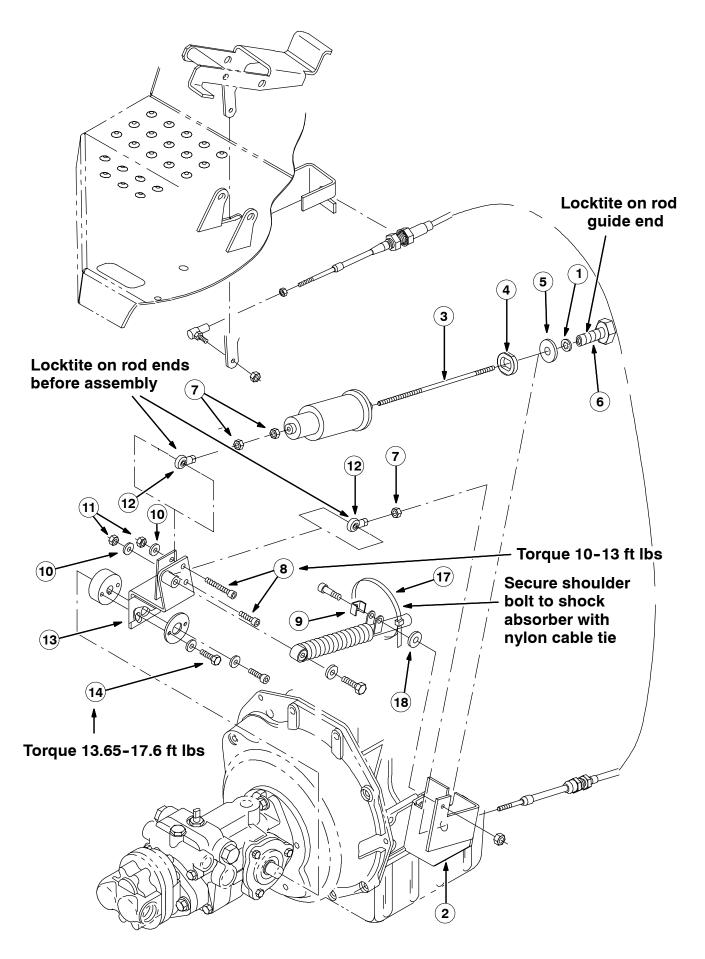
NEW HYDRAULIC PUMP LINKAGE ASSEMBLY
